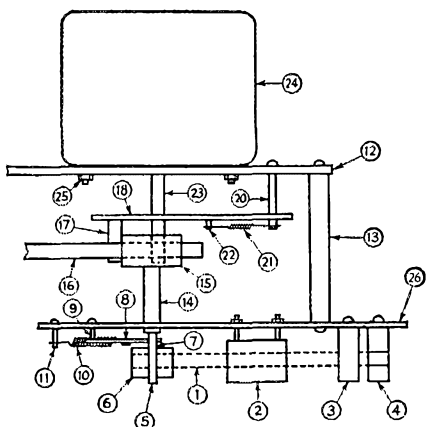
Top view of complete tape-driving mechanism. Tape pressure wheel (6) turns on shaft (7) (hidden by capstan (5) in this view) which is mounted on spring-loaded arm (8).
